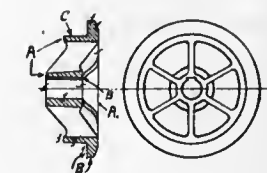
SECTION THROUGH CENTRE OF FOLLOWER.
